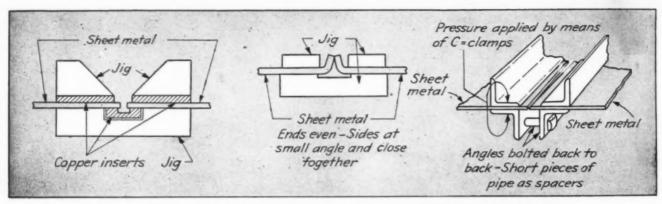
Three types of bar-clamps that provide bulk in the holding jaws and give free access for welding. Clamping arrangements can be offset so that they will not interfere with the operator.
